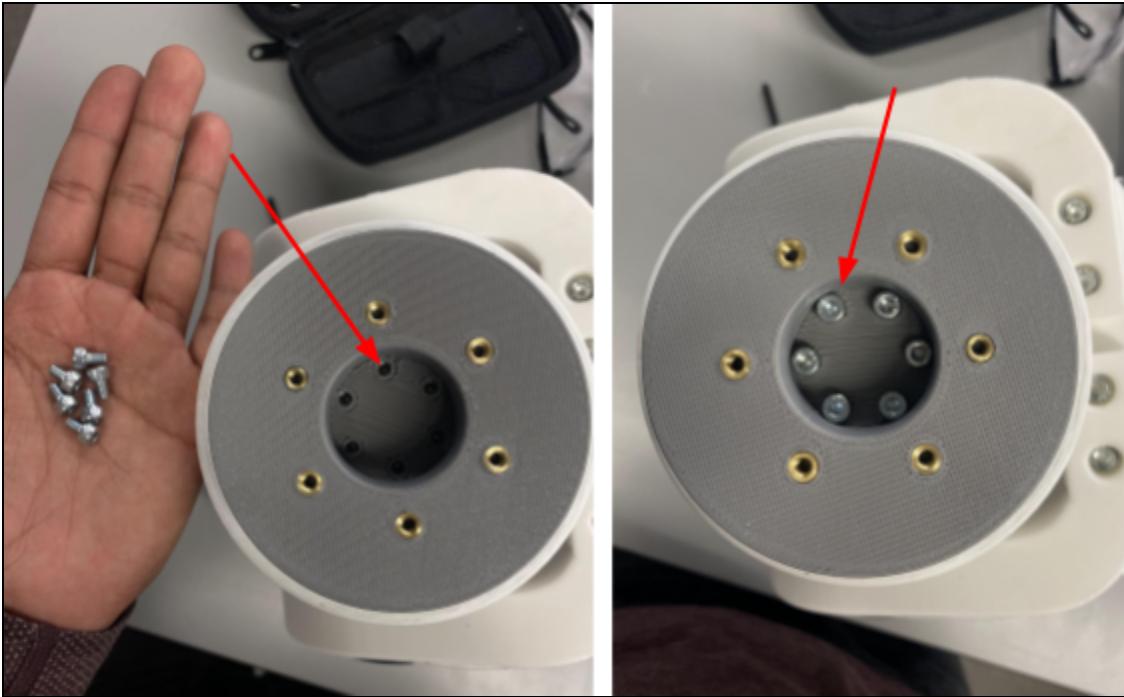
J4 Mushroom Cap to J4 Motor Shaft
